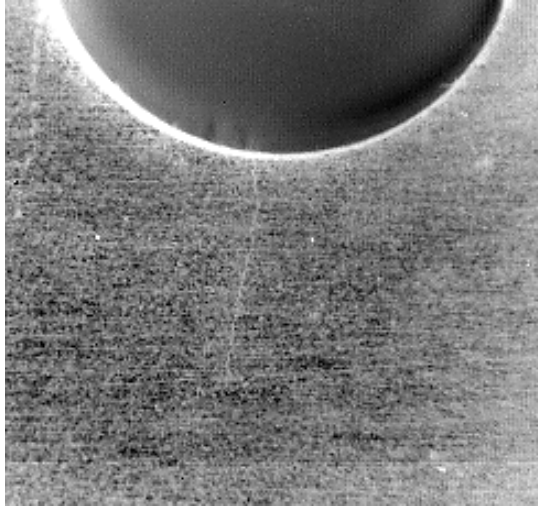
0.120" fatigue crack in 2024 aluminum bar imaged through 3.5 mil primer and topcoat.
